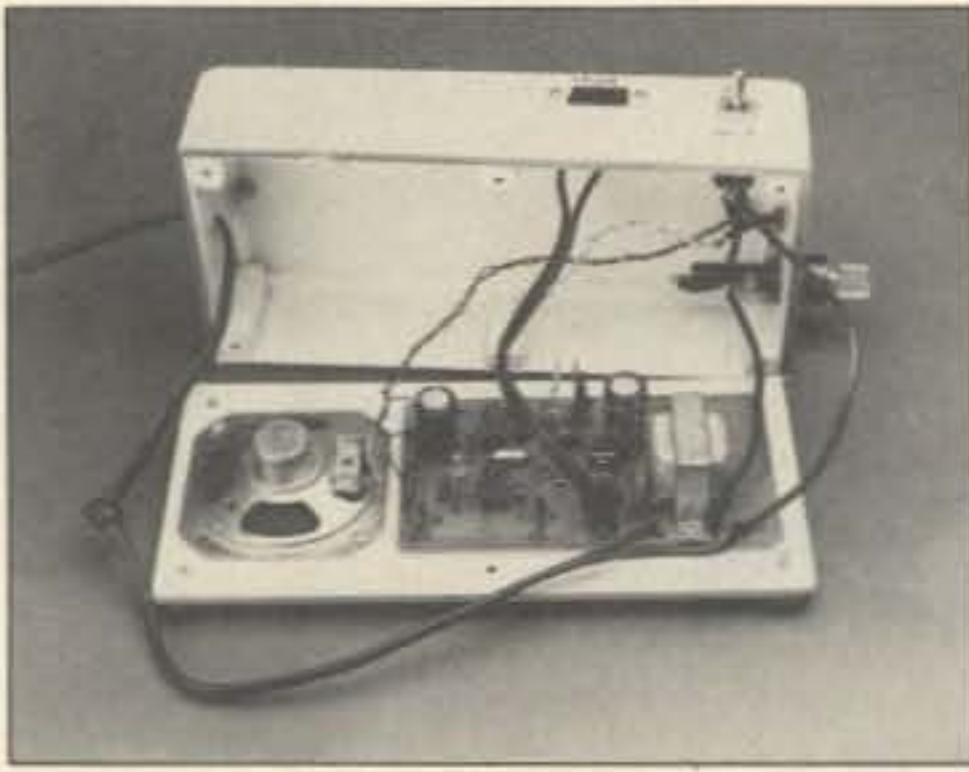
Photo C. Parts placement in plexiglass box. Note: series wired switch and fuse. Also D-6 mounted next to fuse using extension wires.
